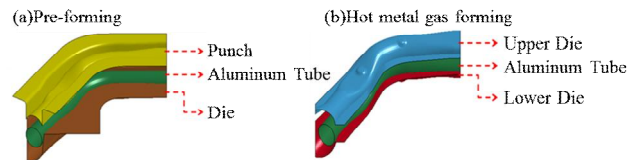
Modeling of tube and mould for hot metal gas forming, (a) Pre-forming, (b) Hot metal gas forming
